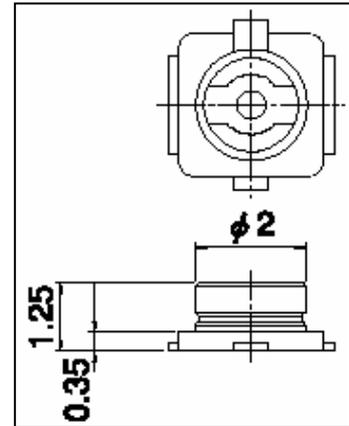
Mechanical dimensions of U.FL-R-SMT connector
